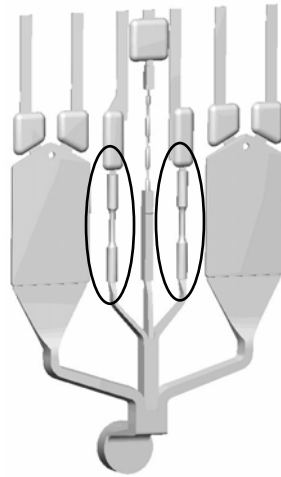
Test multispecimen casting; the investigated tensile test specimens are encircled.
